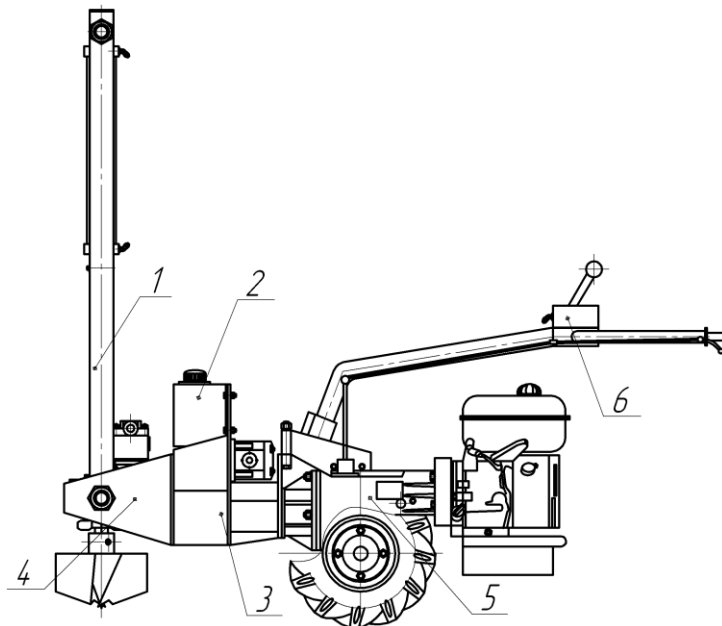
Unit for drilling with mounted equipment: 1 - drilling block, 2- hydraulic tank, 3 - frame 4 – motor-reducer, 5 - rototiller, 6 - flow control device.
